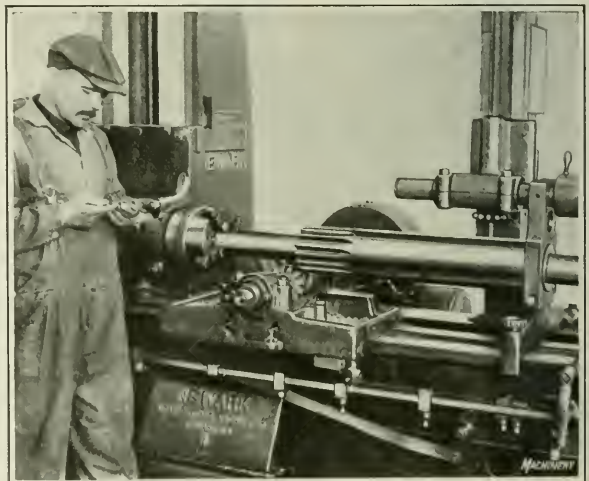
Cutting a Pinion Integral with a Long Shaft
